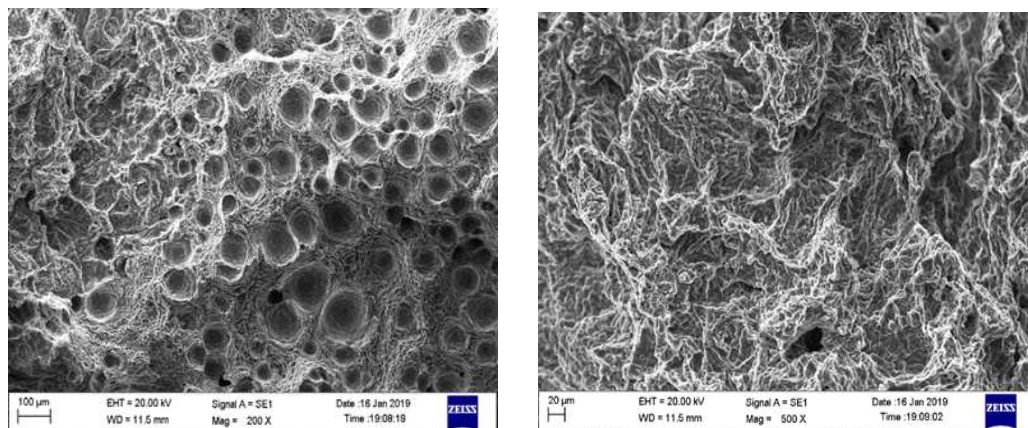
Fracture Surface of the (a) AA6061 Alloy (b) MIG welded AA6061 Alloy.
